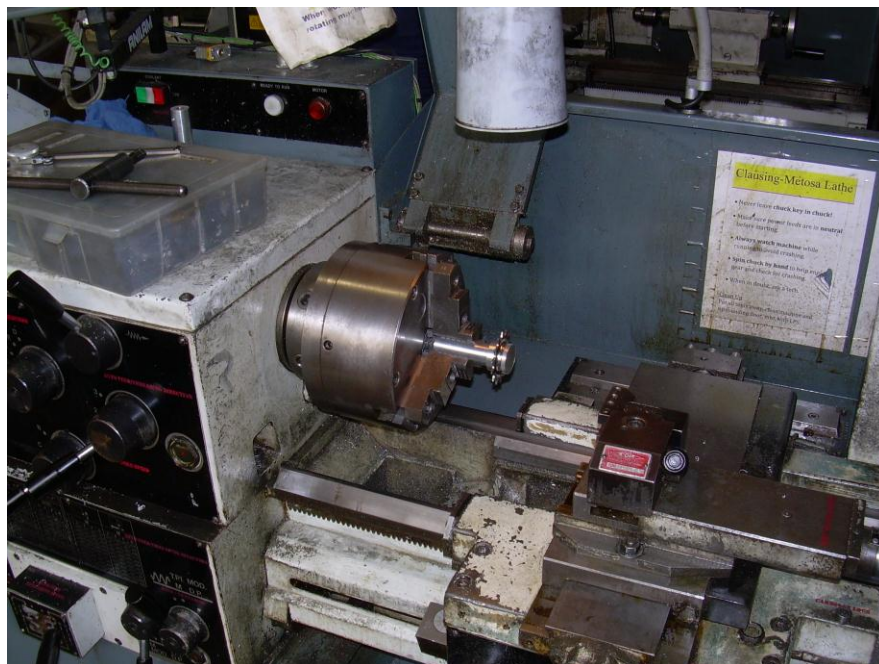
Planeteer Will Lennox manufacturing one of two couplers on the lathe.
